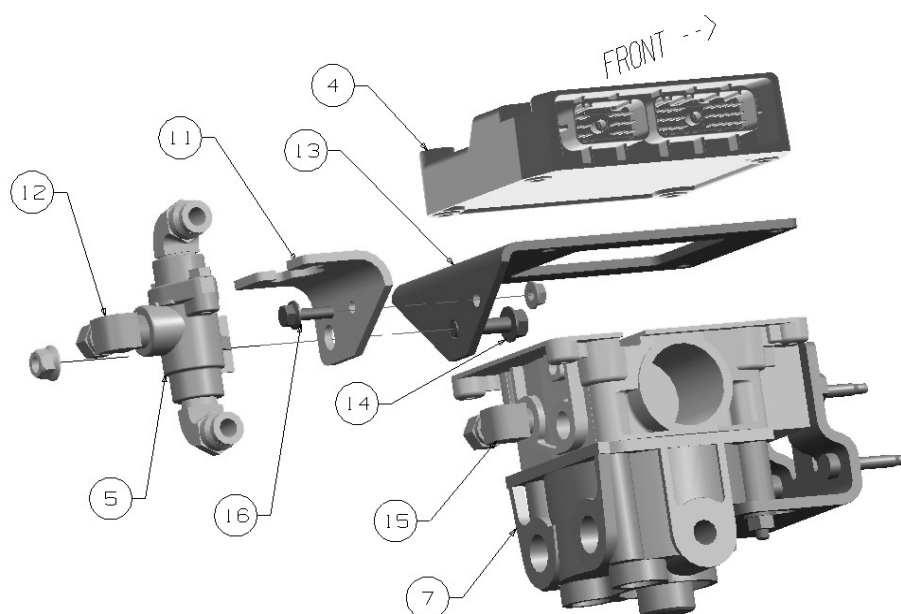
Exploded View of Valve Assembly With the Bracket Kit
